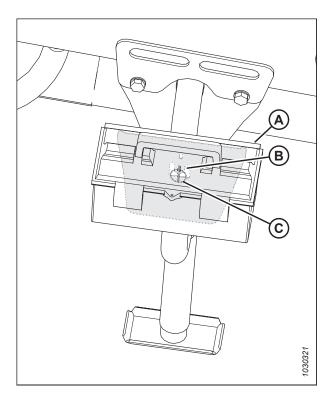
Toolbox Mounted on Jack Stand Bracket
